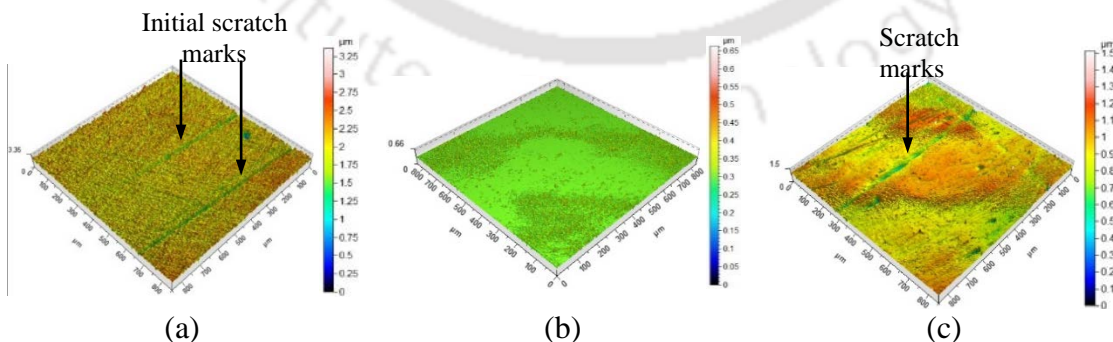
3D surface topography of workpieces (a) before finishing, for (b) 1 mm and (c) 1.4 mm working gap with 1000 tool rpm and 4 hrs. finishing time
